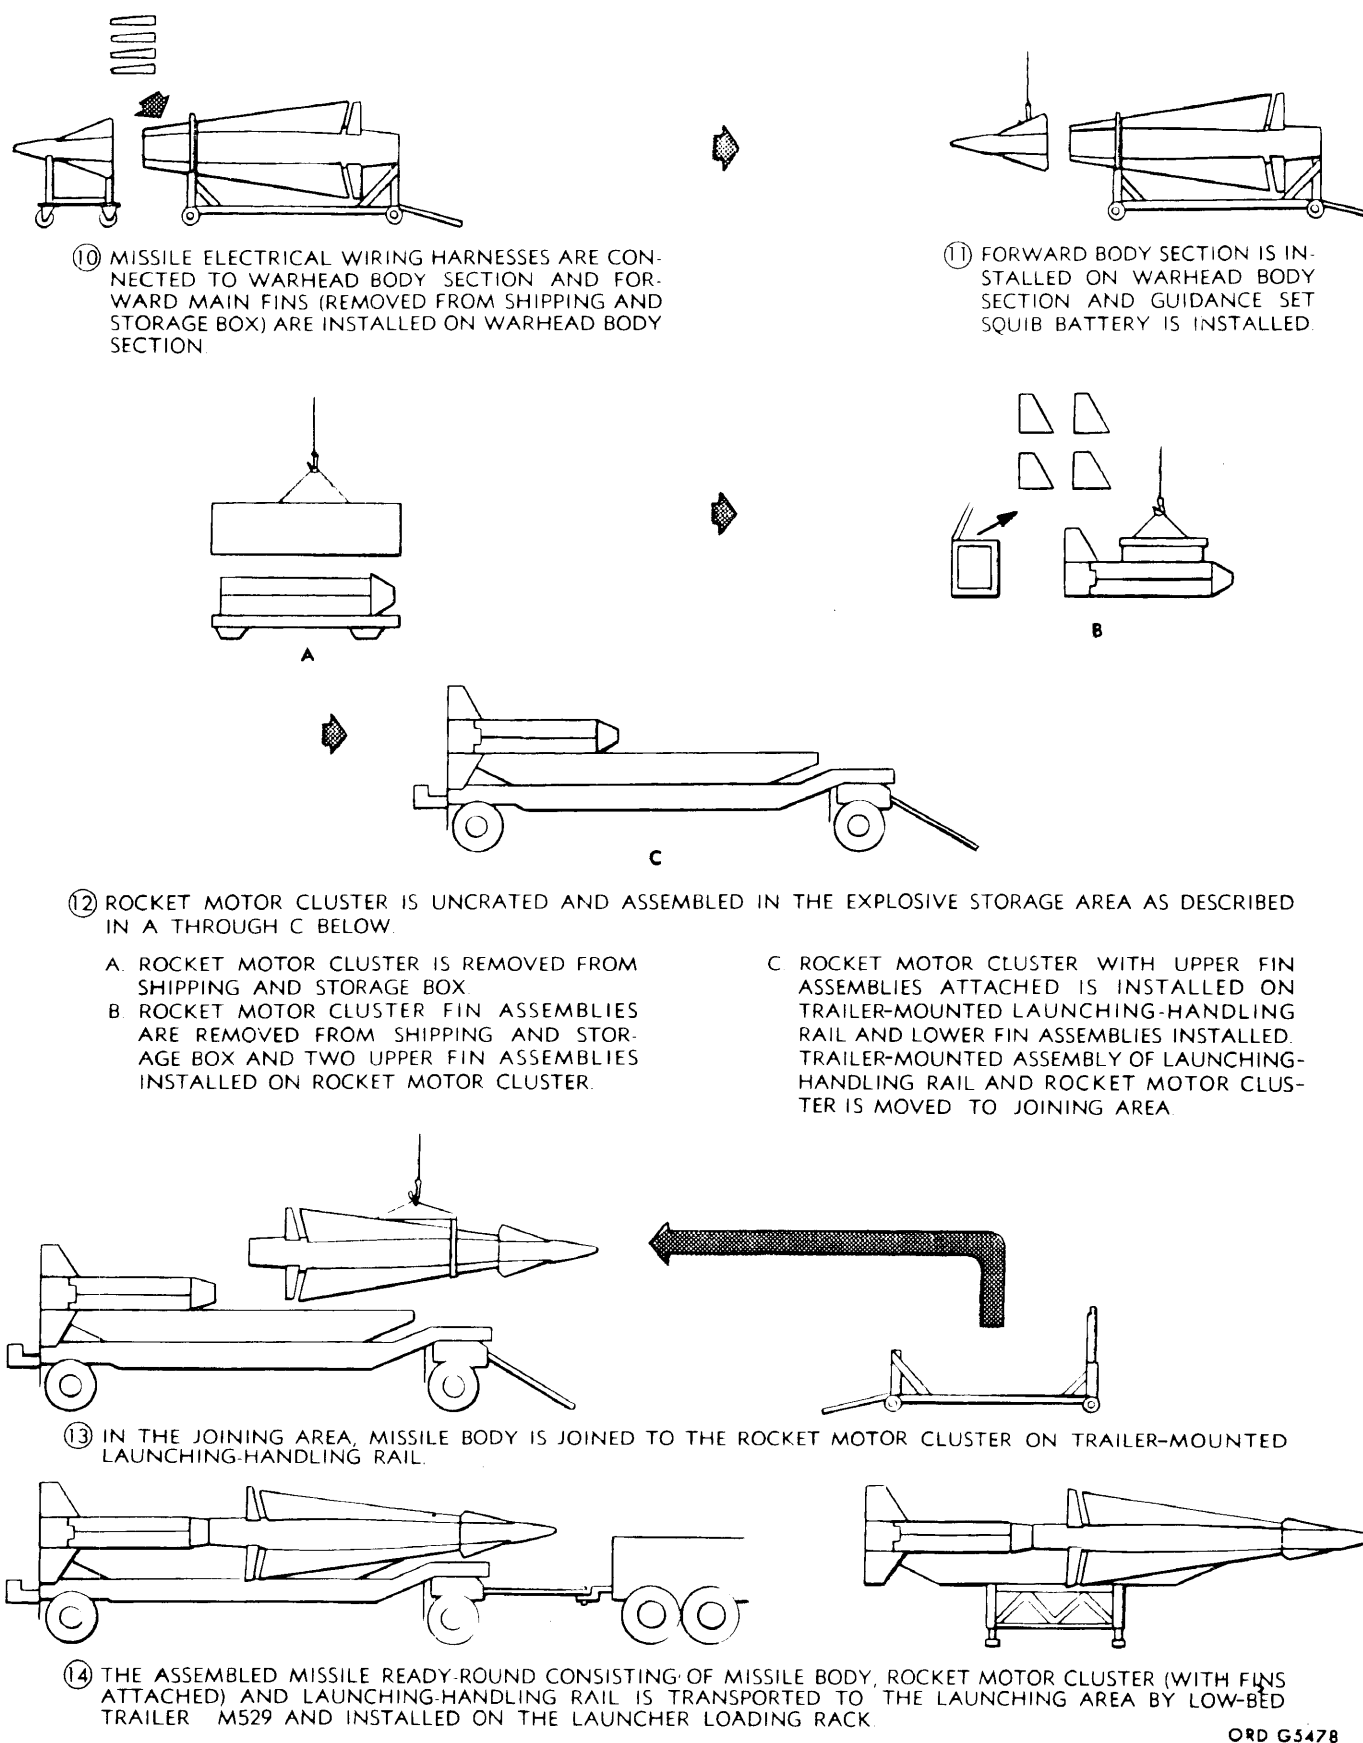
Assembly and service operations — mobile-type assembly area installation—
